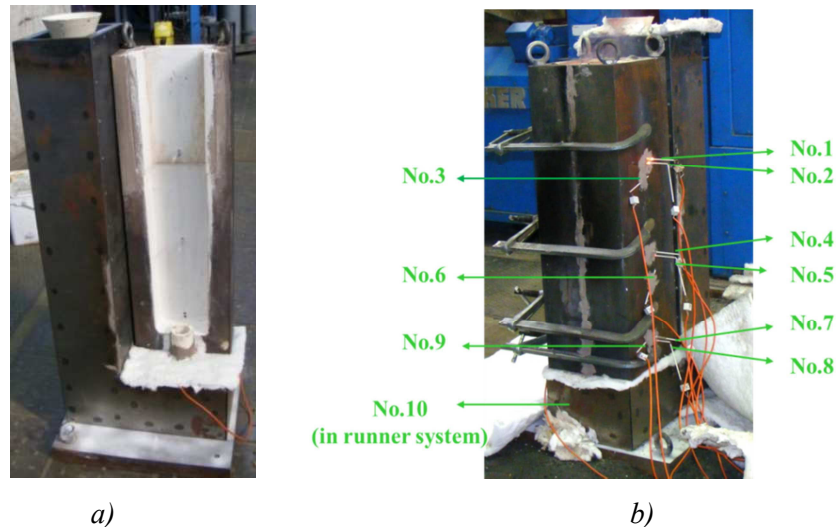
a) Cast iron mould for the 100 kg ingots, b) mould instrumented with thermocouples
